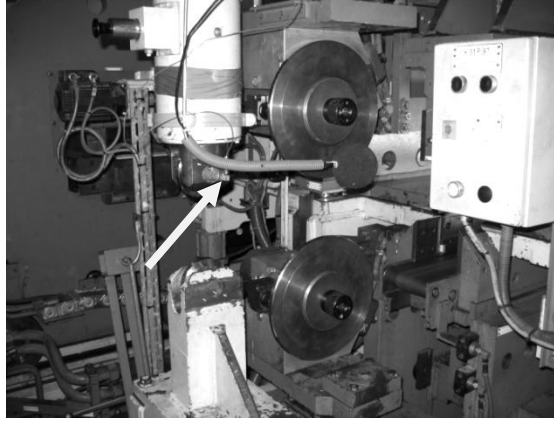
Location of the accelerometer on the forging wheel of the welding machine
